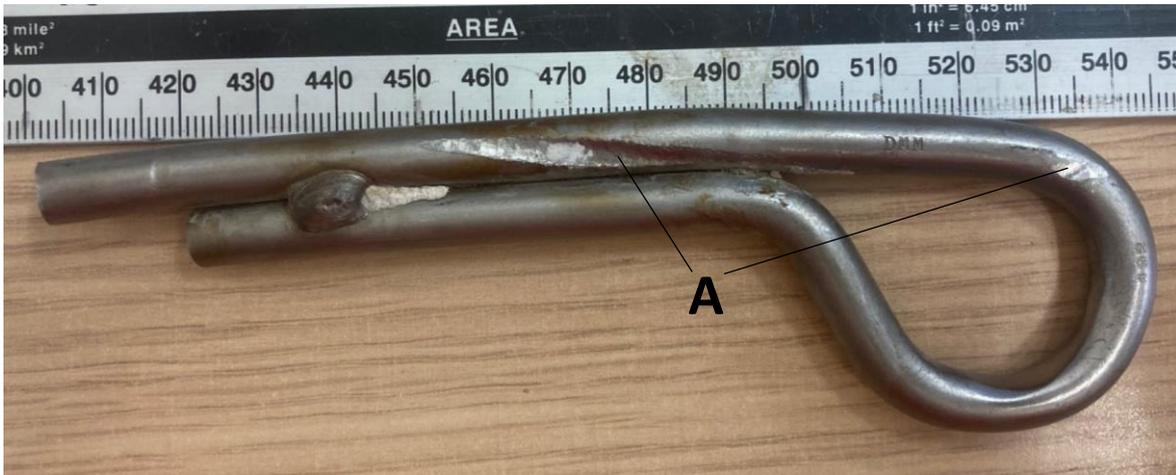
DMM A92 left side Drill marking 535, 500-450mm.
